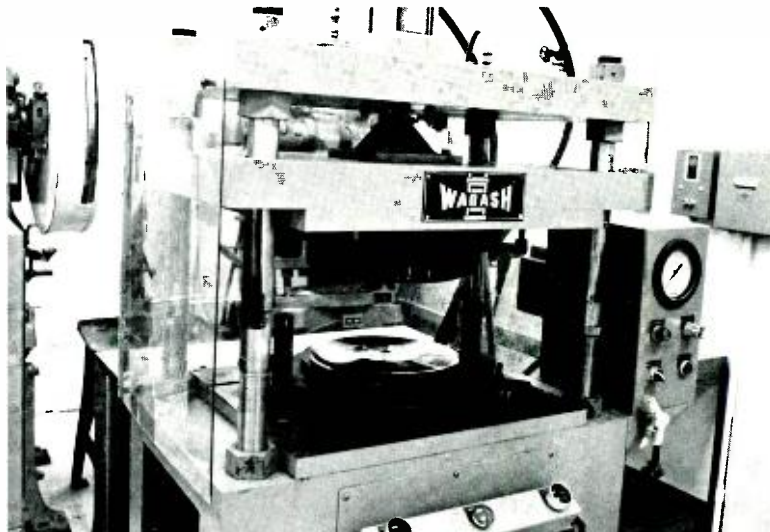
Hydraulic press forms center and edge of stamper for proper record contour.
